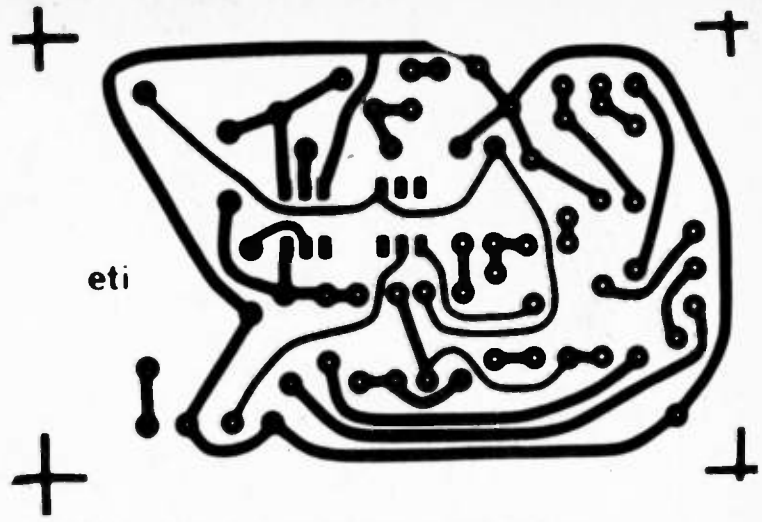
Printed circuit board foil pattern (full size) for circuit shown in Fig.1.
